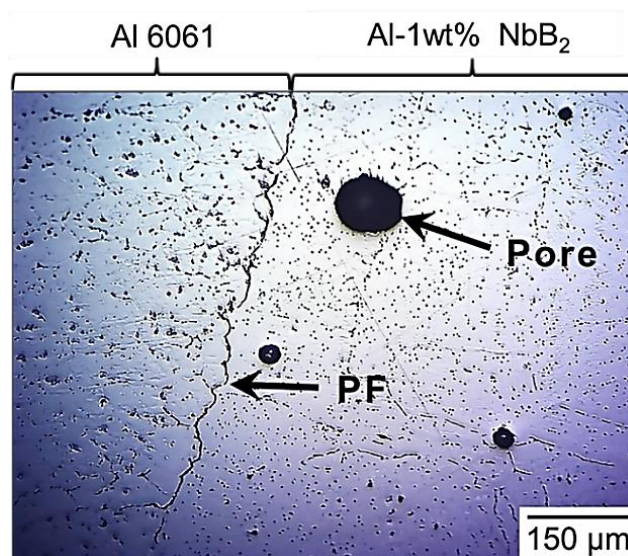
Partial fusion (PF) of welded AA 6061 plates with Al-1wt% NbB₂ filler.
